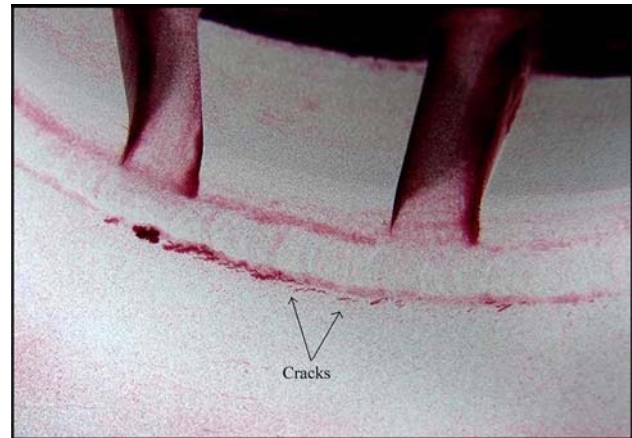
Location and morphology of cracks as revealed by dye penetrant testing
